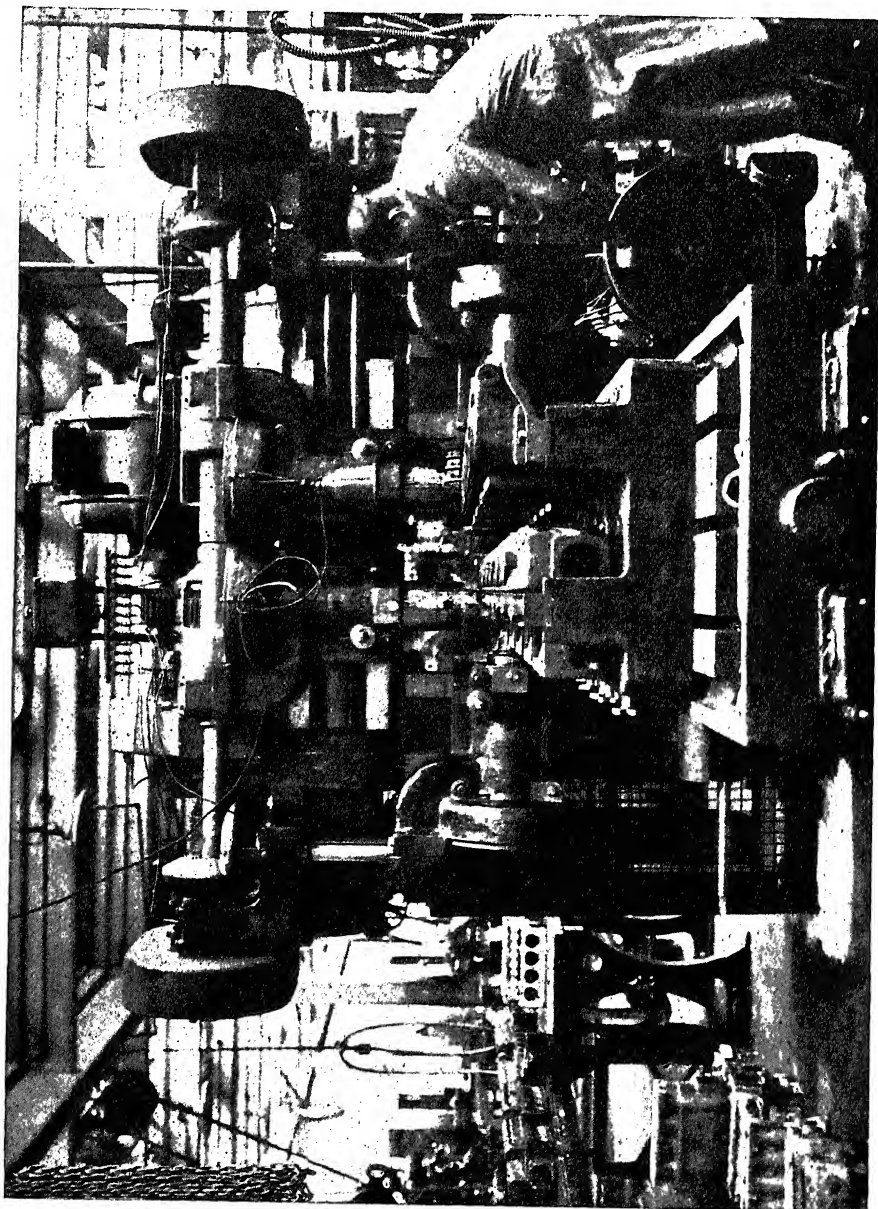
Twelve Motor Cylinders in a Fixture being Milled on an Ingersoll Machine. View from the end
